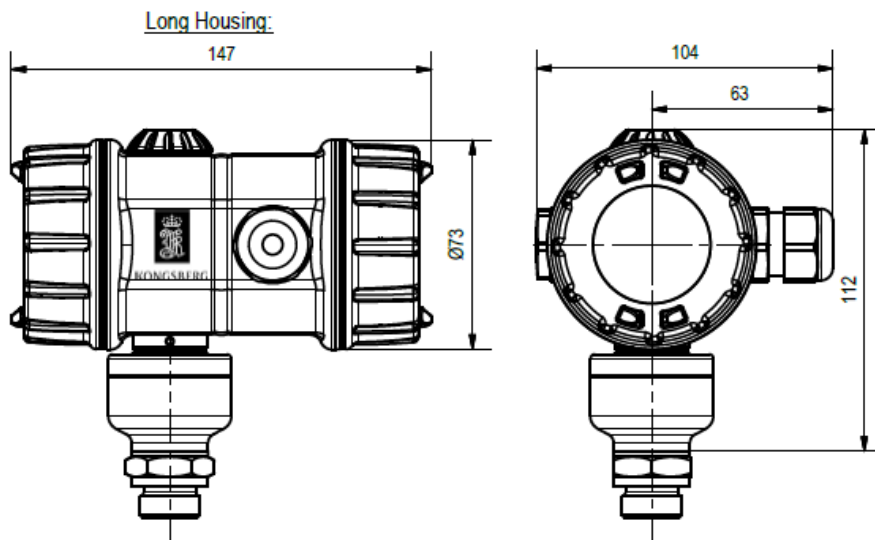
GT405 long version with EMC cable gland dimensioned for cable diameter 6 - 12 mm
